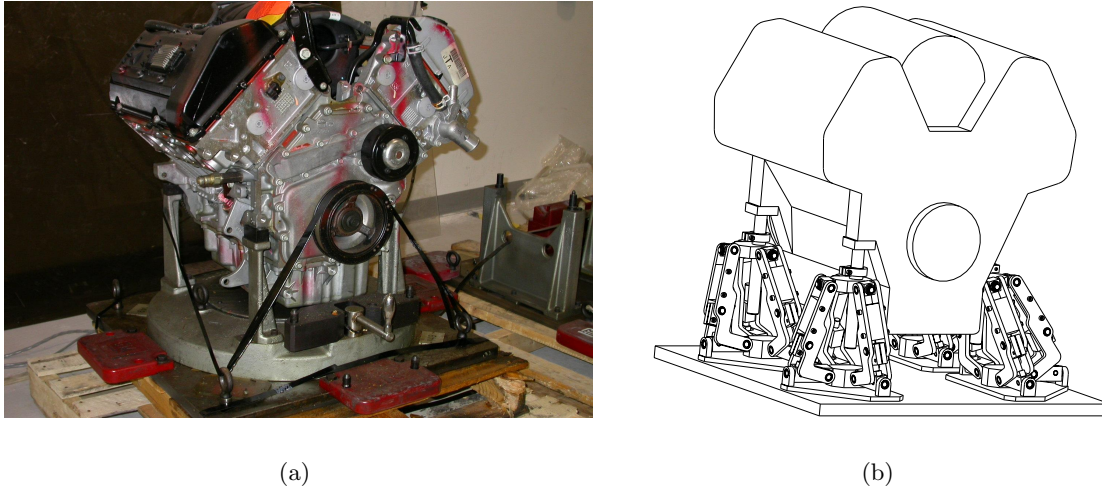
(a) An engine and its pallet used in the automotive industry (b) Example of complete flexible fixture system.
